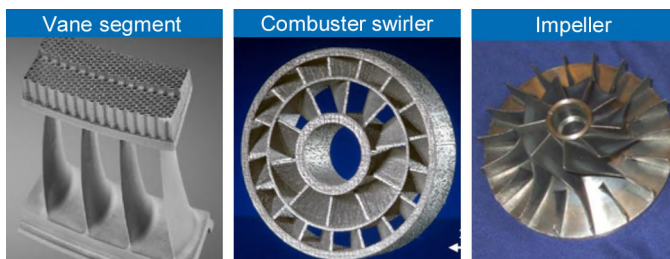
AM manufactured vane segment with honeycomb seal structure [54], functional prototype of In 718 combustor swirler [103] and In 718 impeller blading build on pre-machined part [216].
